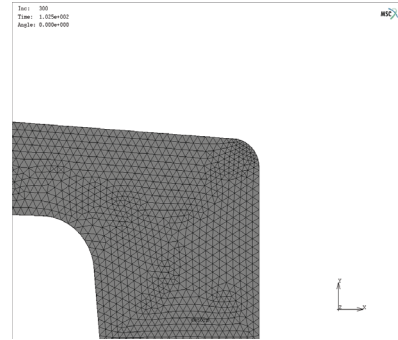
Grid detail at the bottom of work piece at the end of forging
